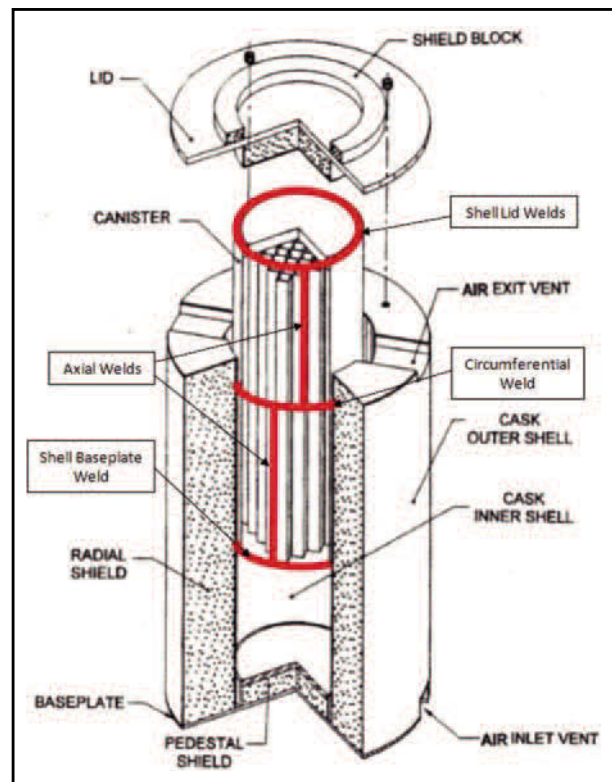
A Holtec HI-STORM canister system, with the canister welds highlighted in red. [7,8]
